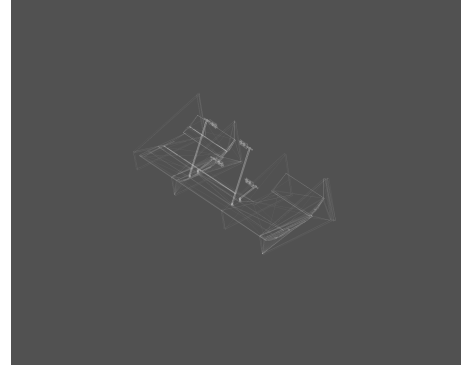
The unexploded view of the front wing of a Formula Student racing car
